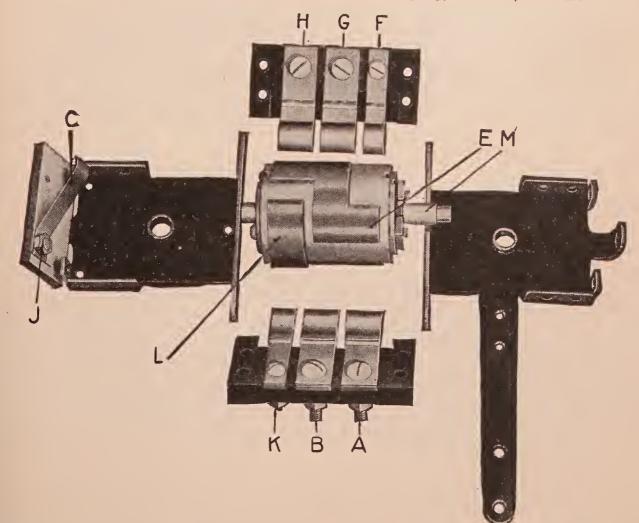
Exploded View of Drum Switch. A, B, F, G, H, and K—Contact Screws to Contact; C—Auxiliary Contact Finger; E—Drum Contact; J—Screw Holding C; L—Auxiliary Drum Contact; M—Shaft
